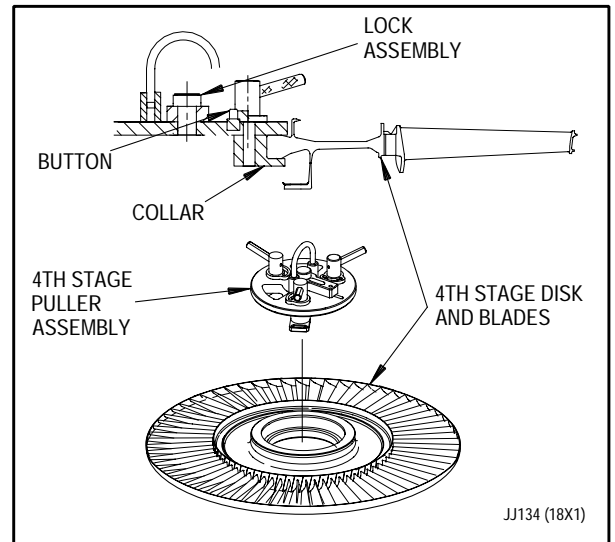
Fourth Stage Turbine Disk, Blades and Air Seal - Installation (Sheet 1 of 7)
